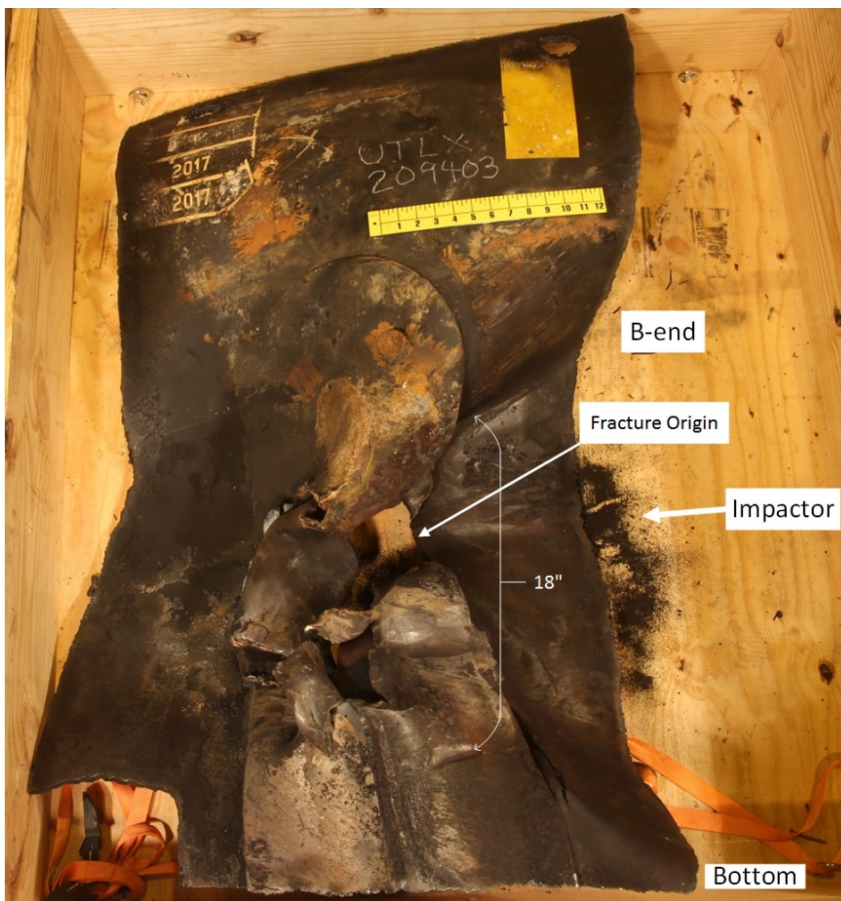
UTLX 209403 tank shell coupon from the B-L bolster region showing the shell fracture origin and buckled shell dimensions.
